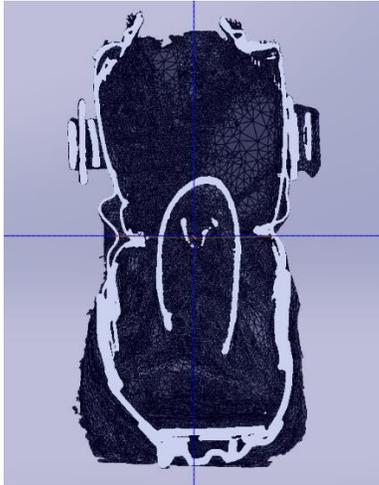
Frontal View of the Boot with the Mesh Cut through the Frontal Plane
